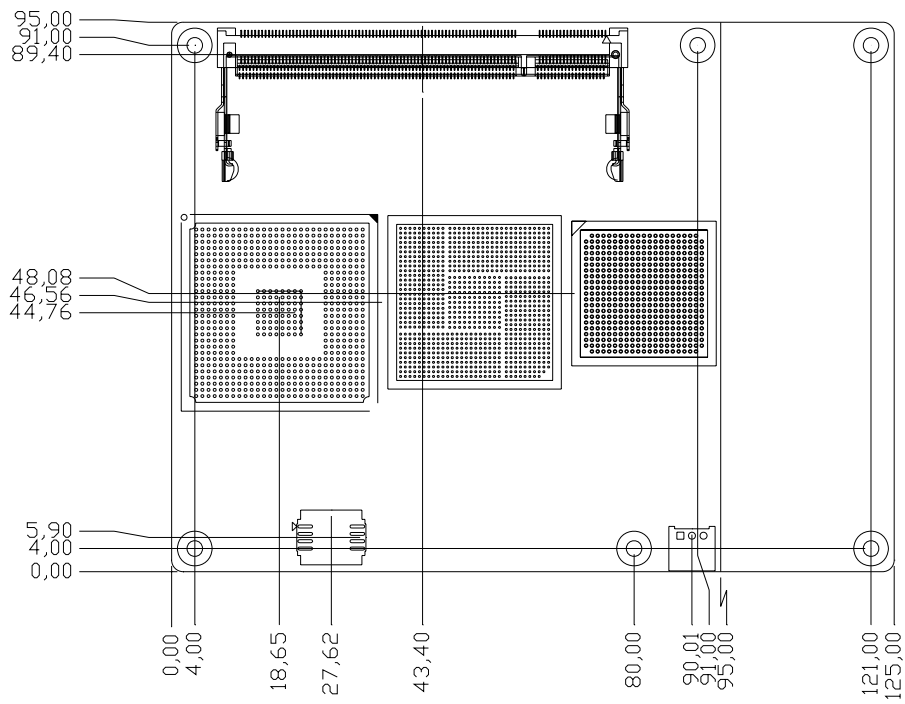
SOM-5761 Board Dimension layout (Component side)
